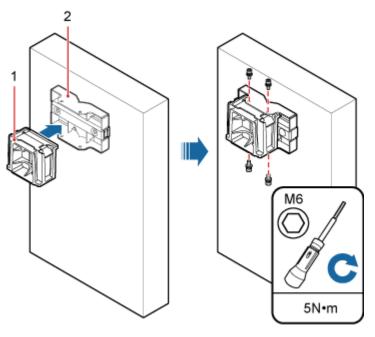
Installing the pole installation bracket on the expansion anchor bolts
